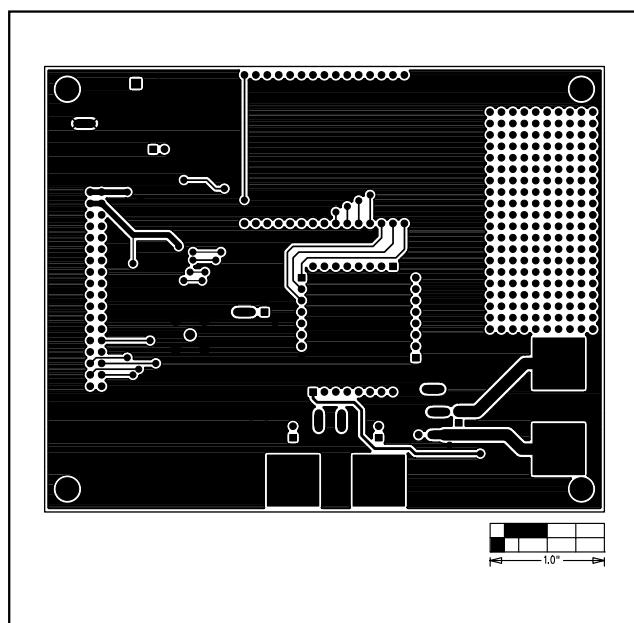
MAX1494 EV Kit PC Board Layout—Solder Side
